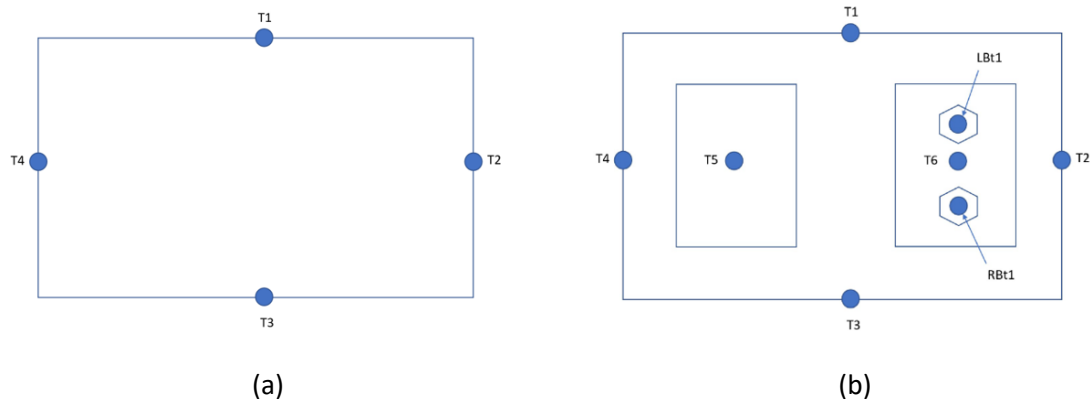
(a) Locations of Thickness Measurements for Plate Specimens (b) Locations of Thickness Measurements for Specimens with Bolted and Welded Features
